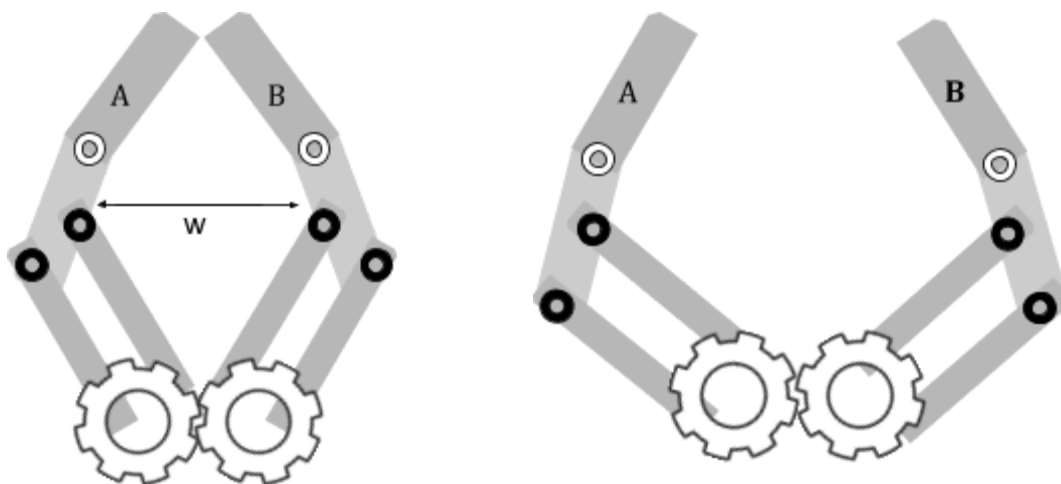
Parallel Pinch Claw Design (Left: Closed Claw, Right: Open Claw)
